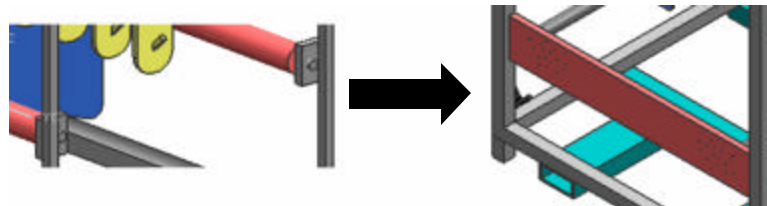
Figure G: Old dunnage bar mounting system modified into new system in order to make fabrication, processing, and assembly easier. New system has one plate that spans across the frame instead of two separate plates.
